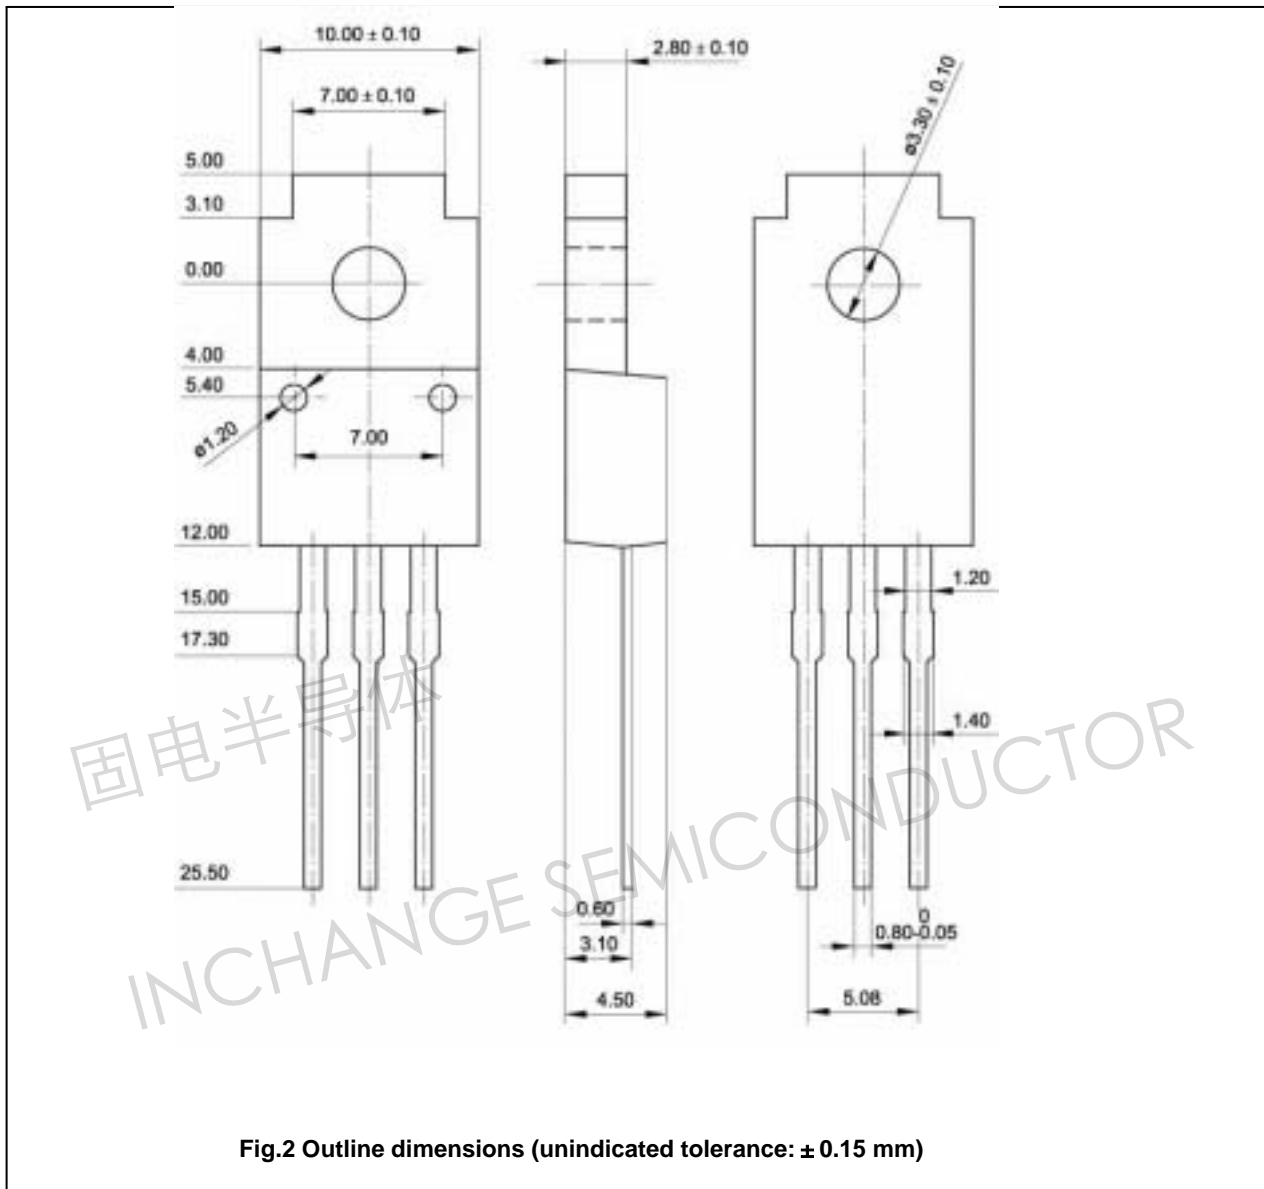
Outline dimensions (unindicated tolerance: ± 0.15 mm)
